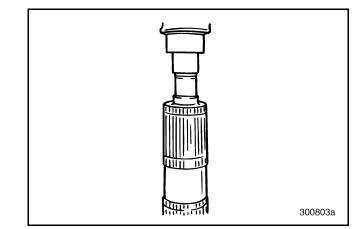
Installing Spigot Bearing Inner Race (T313L/T318L Shown)
